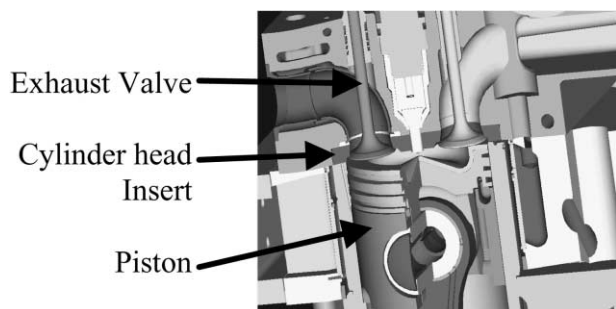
Schematic of internal combustion engine showing the location of the cylinder head insert component.
